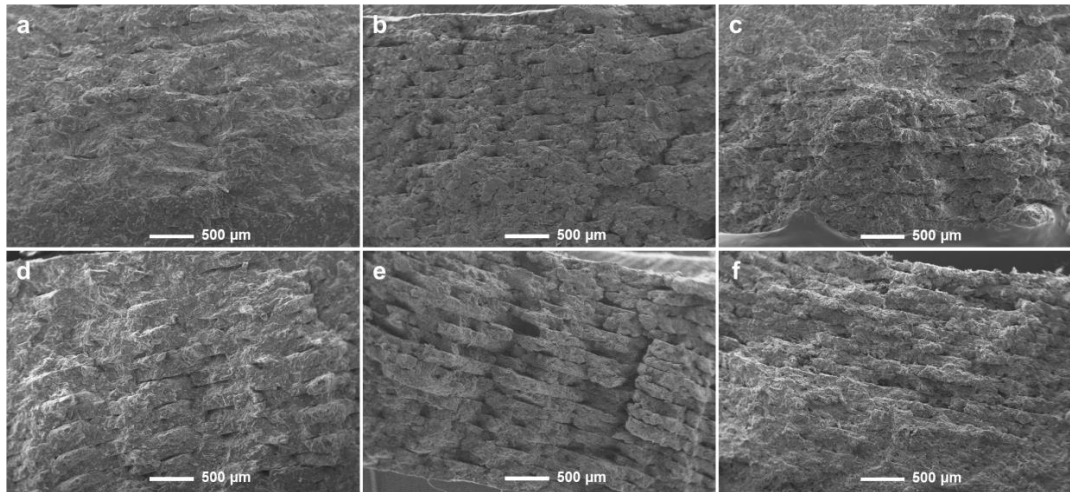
Morphology of impact fractured surfaces of FDM-printed specimens: (a) PLA-BP-10, (b) PLA-BP-20, (c) PLA-BP-40, and (d) PLA-HH-10, (e) PLA-HH-20, (f) PLA-HH-40.
